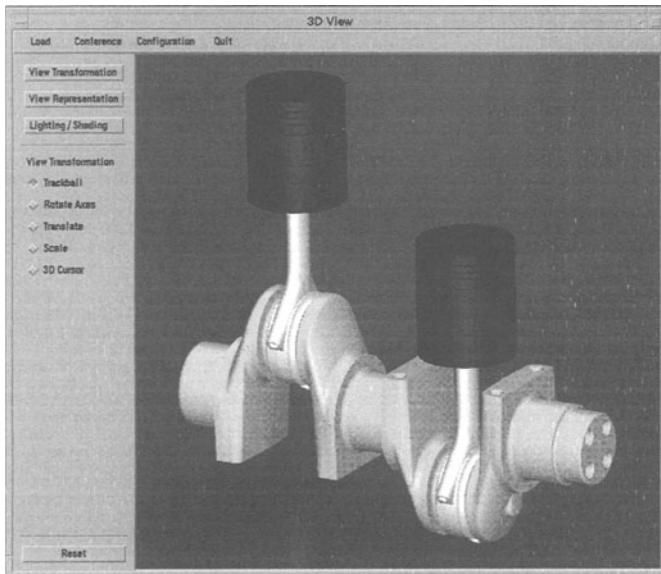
The 3D CAD Viewer showing the driveshaft assembly.
